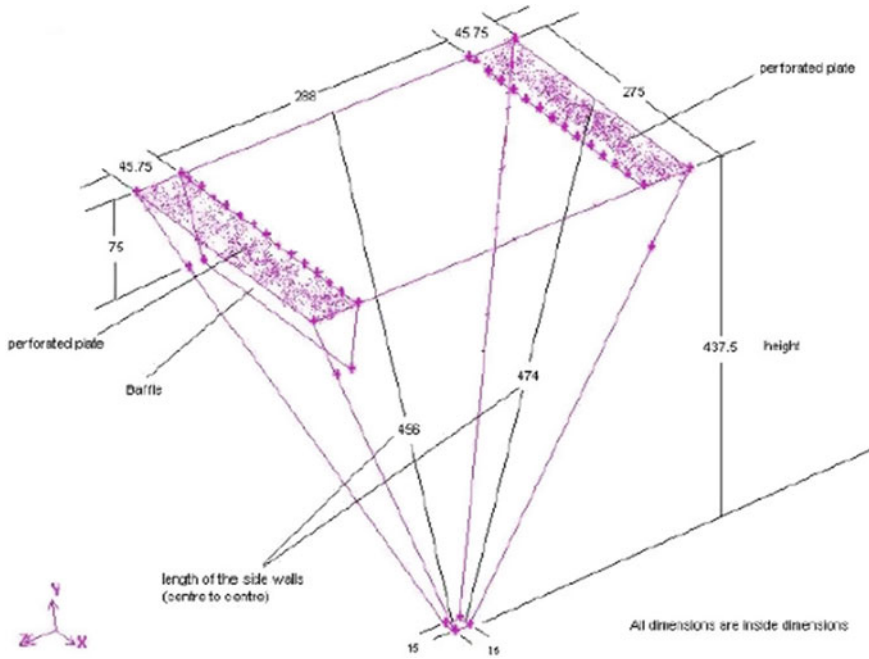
Hopper 1 and 4 (dimension are in mm) [38]
